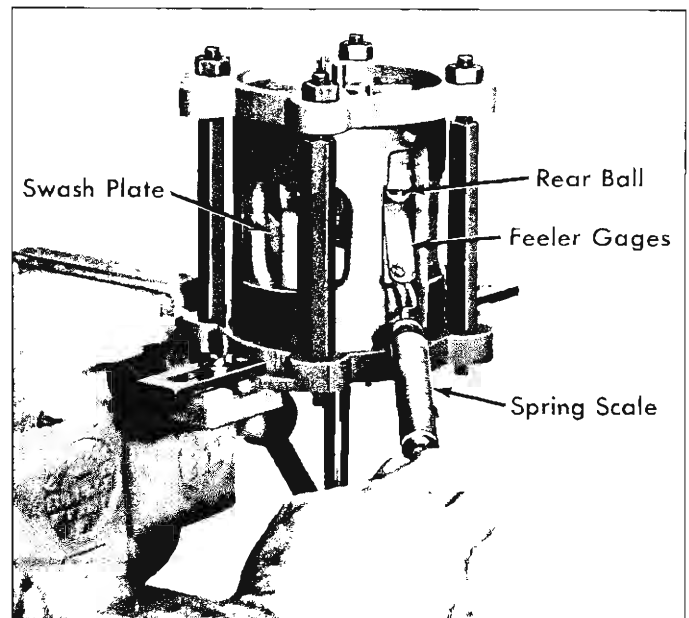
Checking Clearance Between Rear Ball and Wobble Plate
